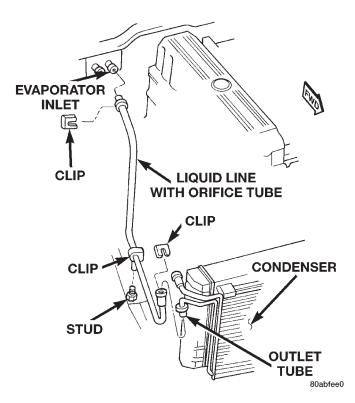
Liquid Line Remove/Install - Left-Hand Drive INSTALLATION
